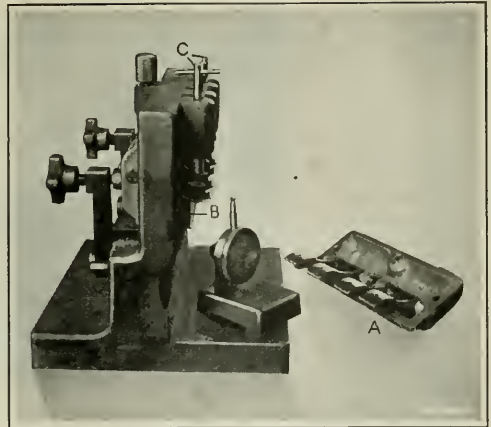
Inspector's Gage and Test Blocks employed for gaging the Ground Cheek of Valve Followers
